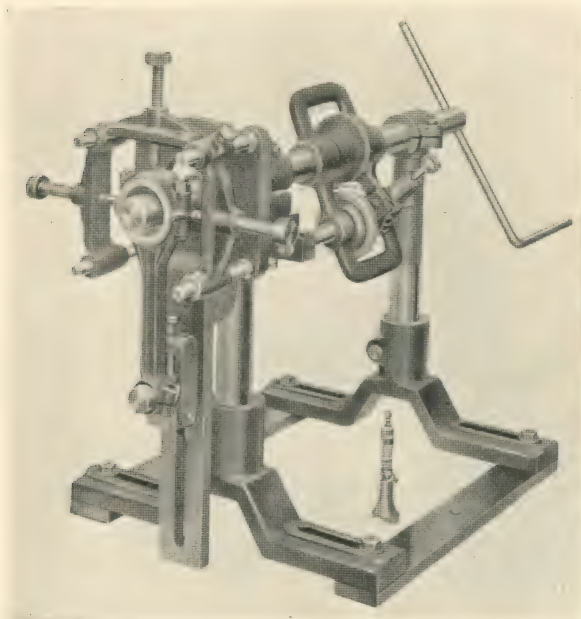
THE CUTHBERT HAND-OPERATED CONNECTING ROD BORING MACHINE
